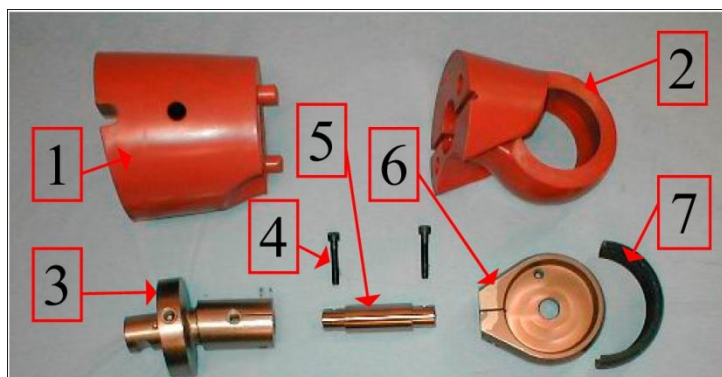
UPPER LEG, EXPLODED VIEW
